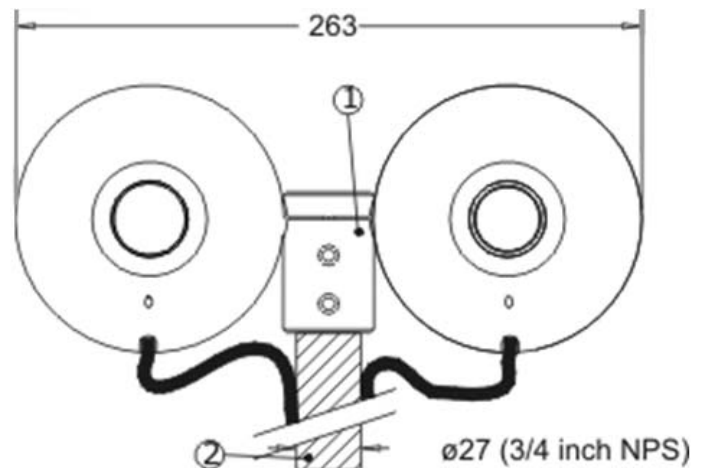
NR01 top view. Standard cable length is 5 m. Cable can be installed / replaced by the user. Attachment to a 1 inch tube is extremely easy, leveling possibilities are included. Dimensions in mm.
